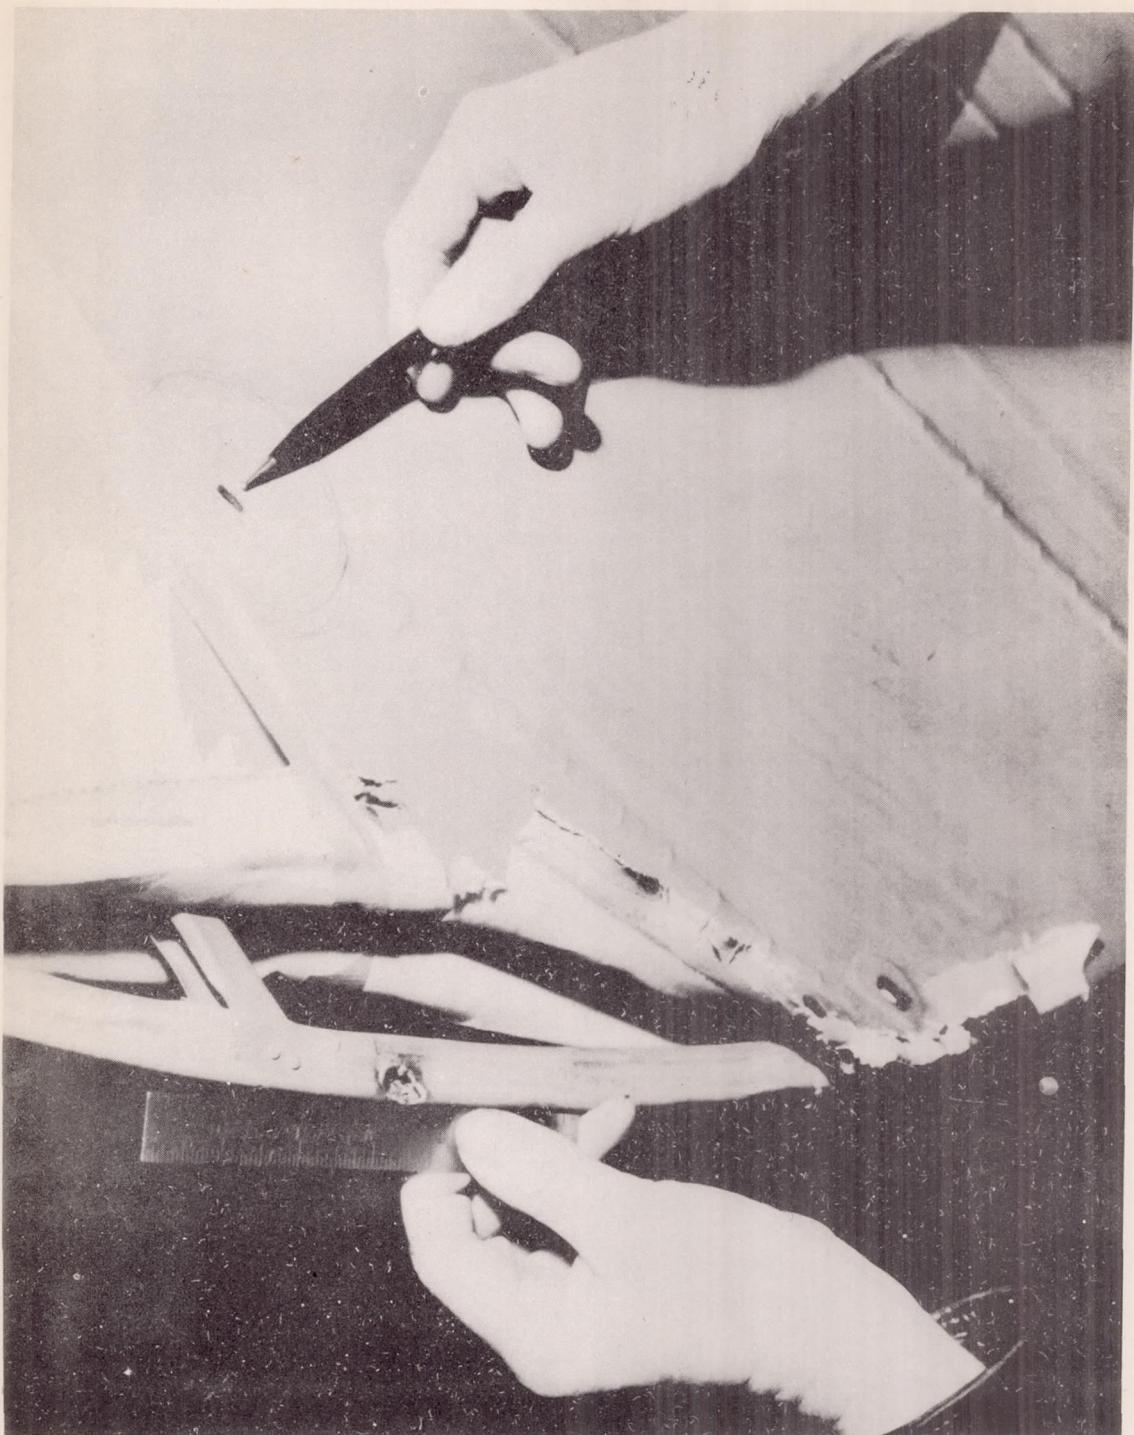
Holes burned through trailing edge former of right elevator and one spot burned through fabric by lightning discharge.
